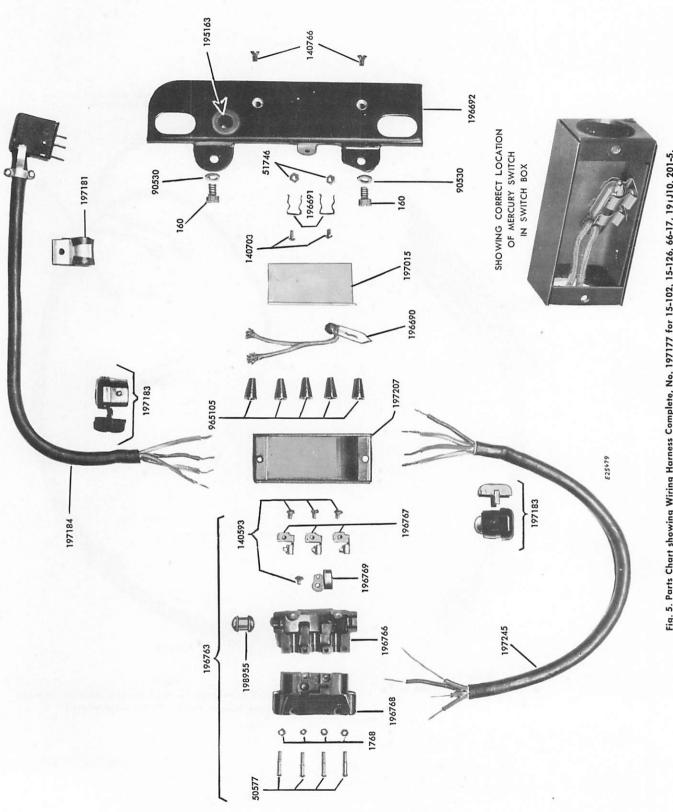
Parts Chart showing Wiring Harness Complete, No. 197177 for 15-102, 15-126, 66-17, 191310, 201-5, 20135, 306-26 and 319-3 Machines in School Tables Nos. 417, 418 and 419
